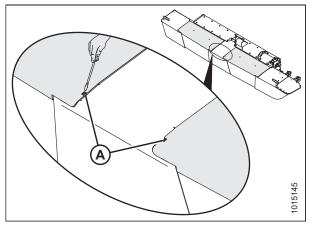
Cutterbar Door Latch Access Hole – Export Only
